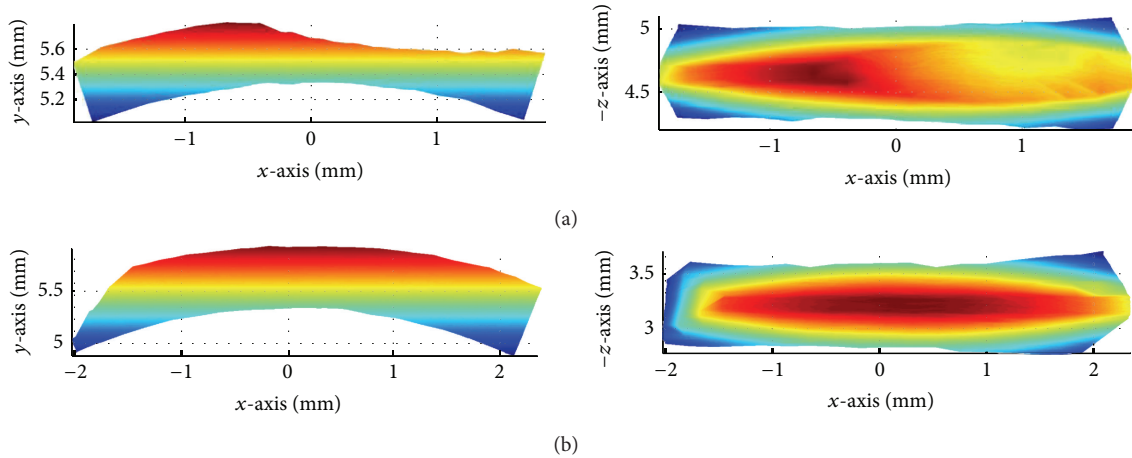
Top (left) and side (right) views of the defective (a) and defectless (b) cutting lips of the thread mill shown in Figure 11.
